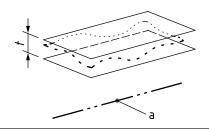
Examples of geometrical tolerancing (Cont.)
